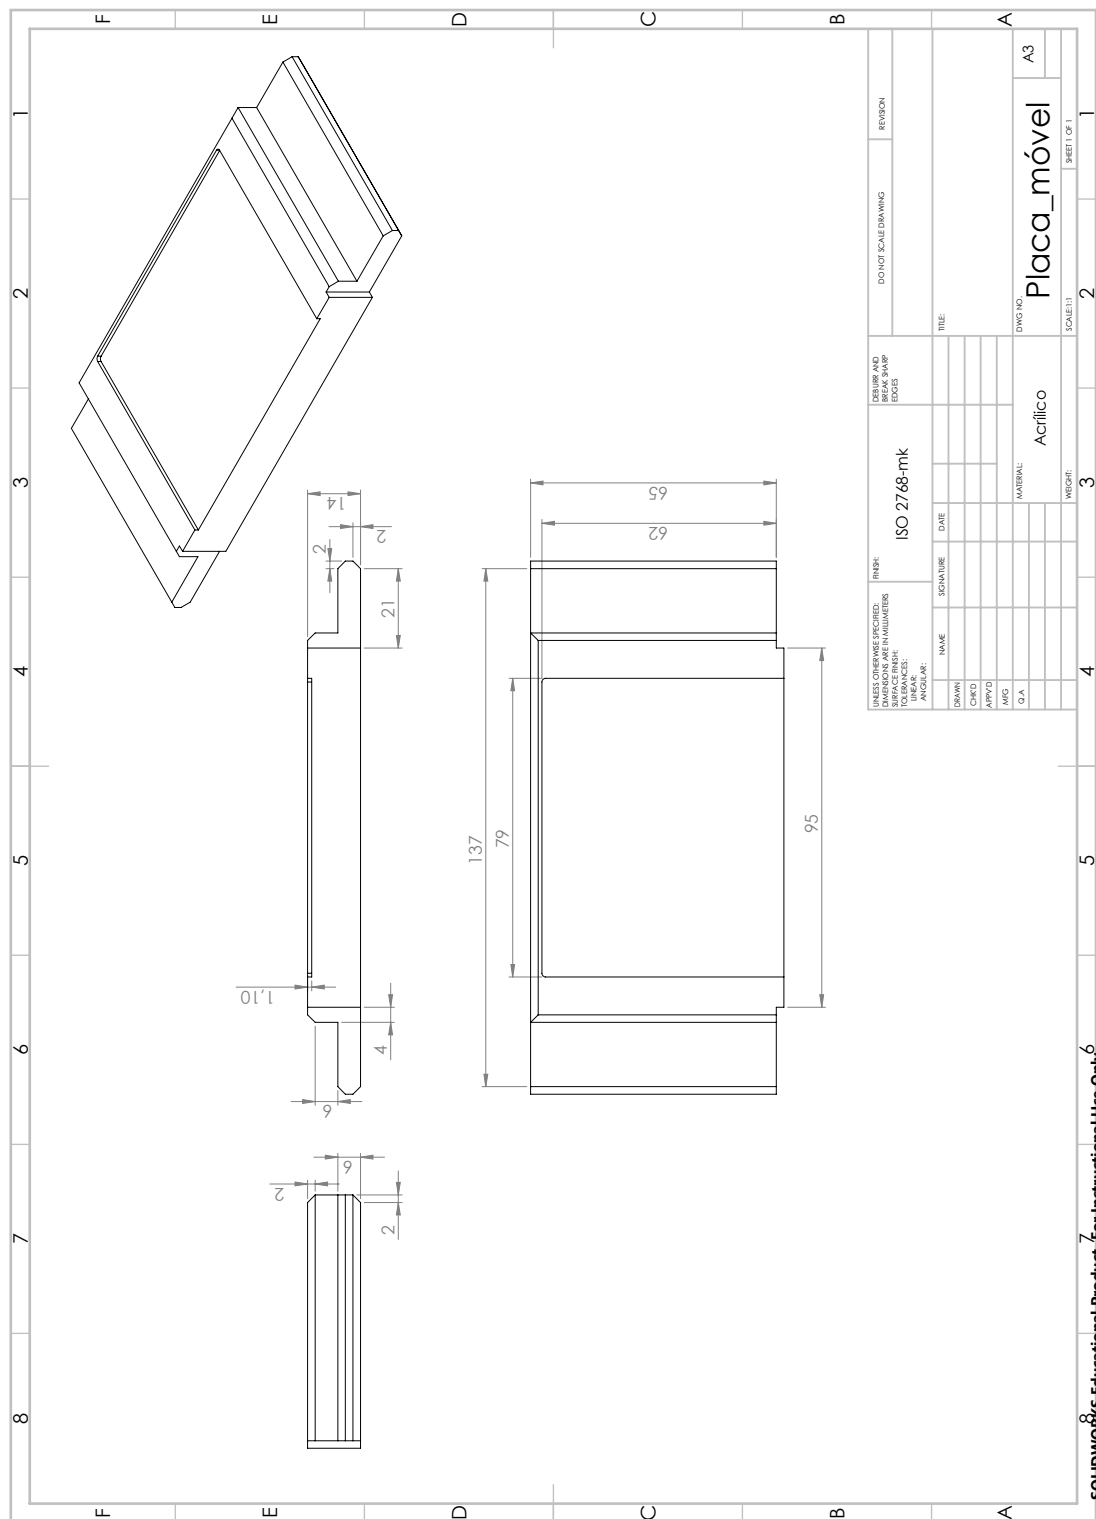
Technical drawing of the capacitor support for the experimental setup.
